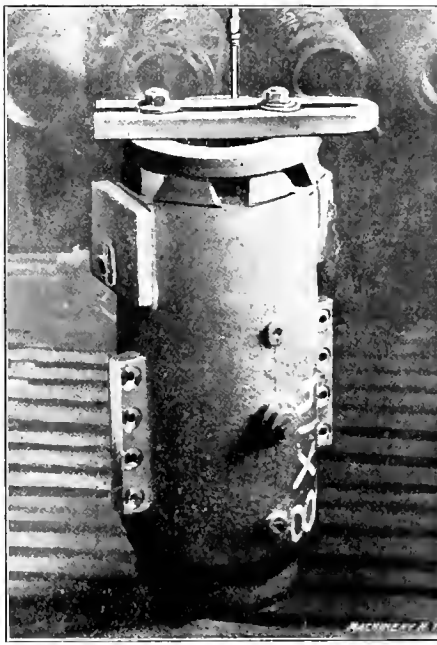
The Final Cold Water Test of the Finished Cylinder
